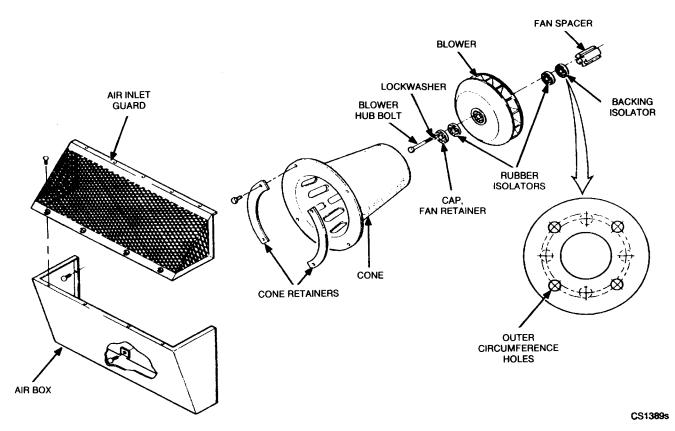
QSA-SERIES COOLING BLOWER ASSEMBLY
